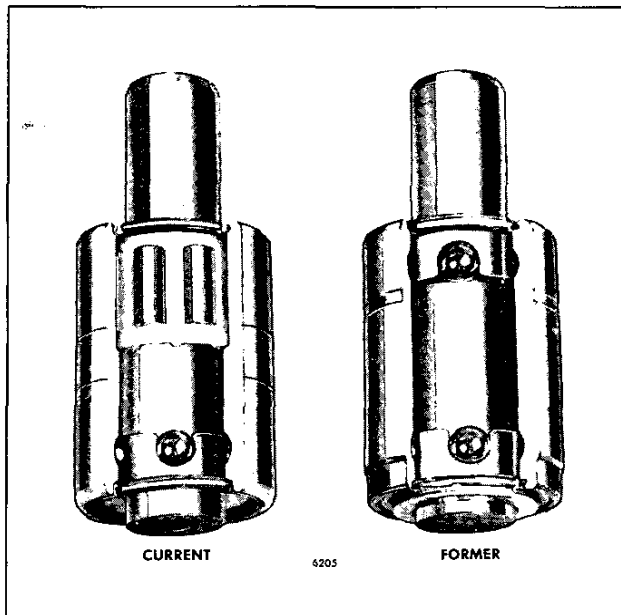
Heavy-Duty Shaft and Bearing Assembly
